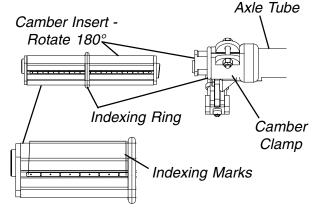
REPOSITIONING CAMBER INSERTS (ADJUSTING REAR WHEEL CAMBER)
